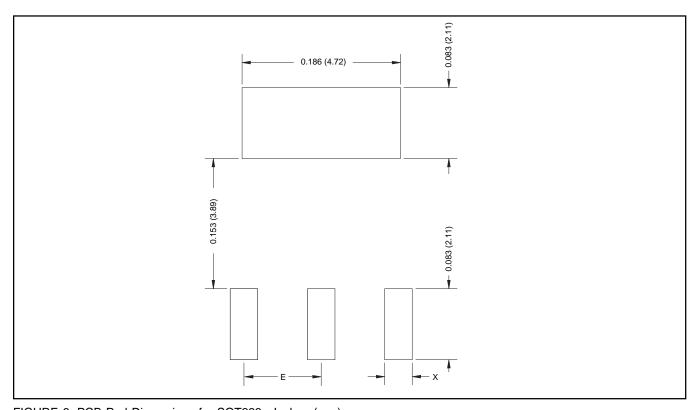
PCB Pad Dimensions for SOT223—Inches (mm).
